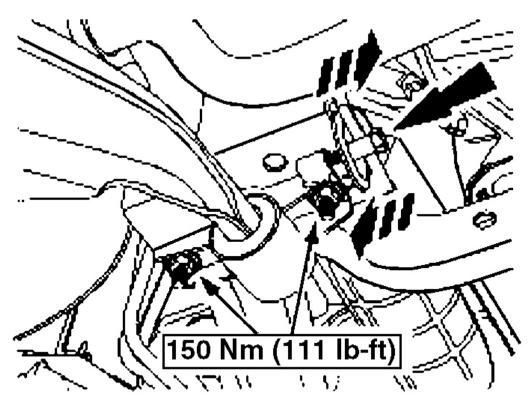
Adjusting Bolt Clockwise To Decrease RH Caster Or Counterclockwise To Increase RH Caster
